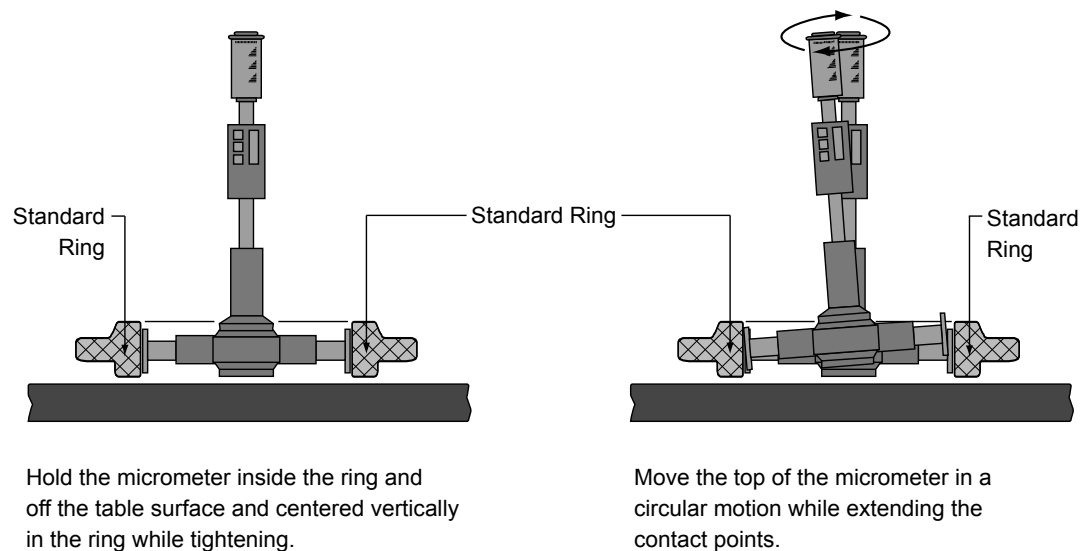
Techniques for Using the Three-Point Bore Gauge with the Calibrated Master Ring
